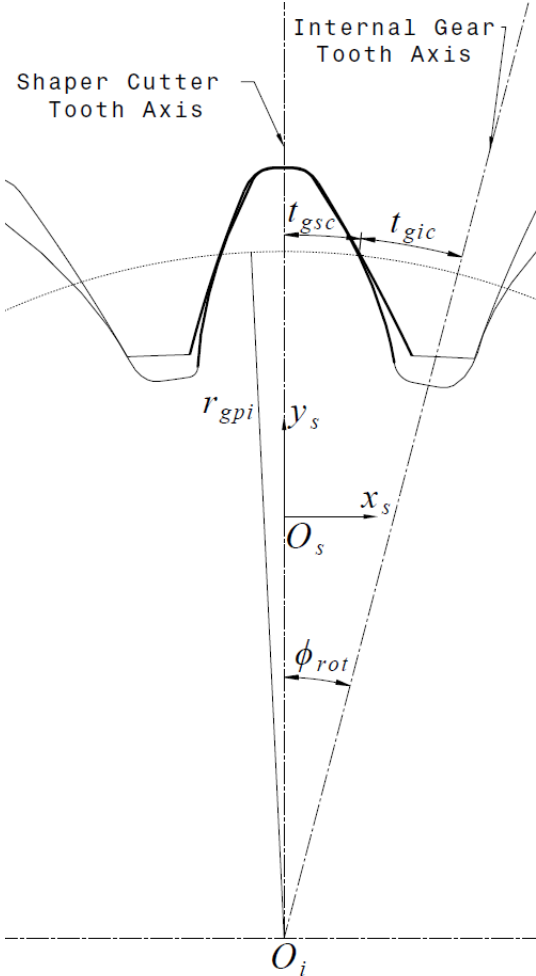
The desired position of the internal asymmetric gear tooth
